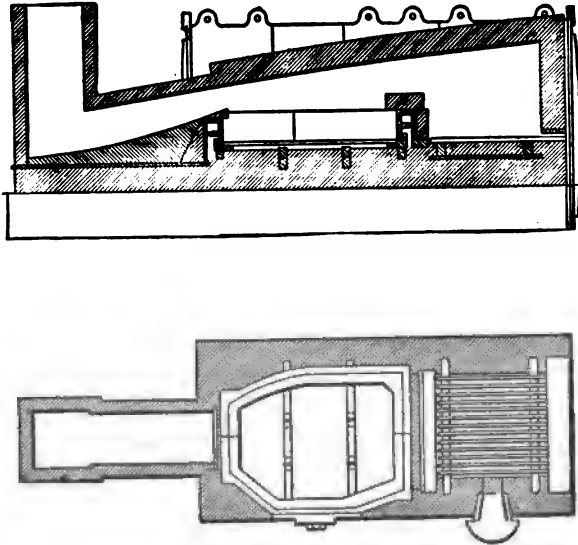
Plan and Section of a Simple Reverberatory Furnace.
